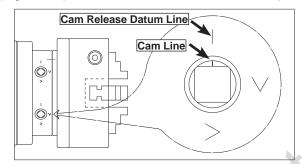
Camlock loosened with the cam line aligned with the datum line.
